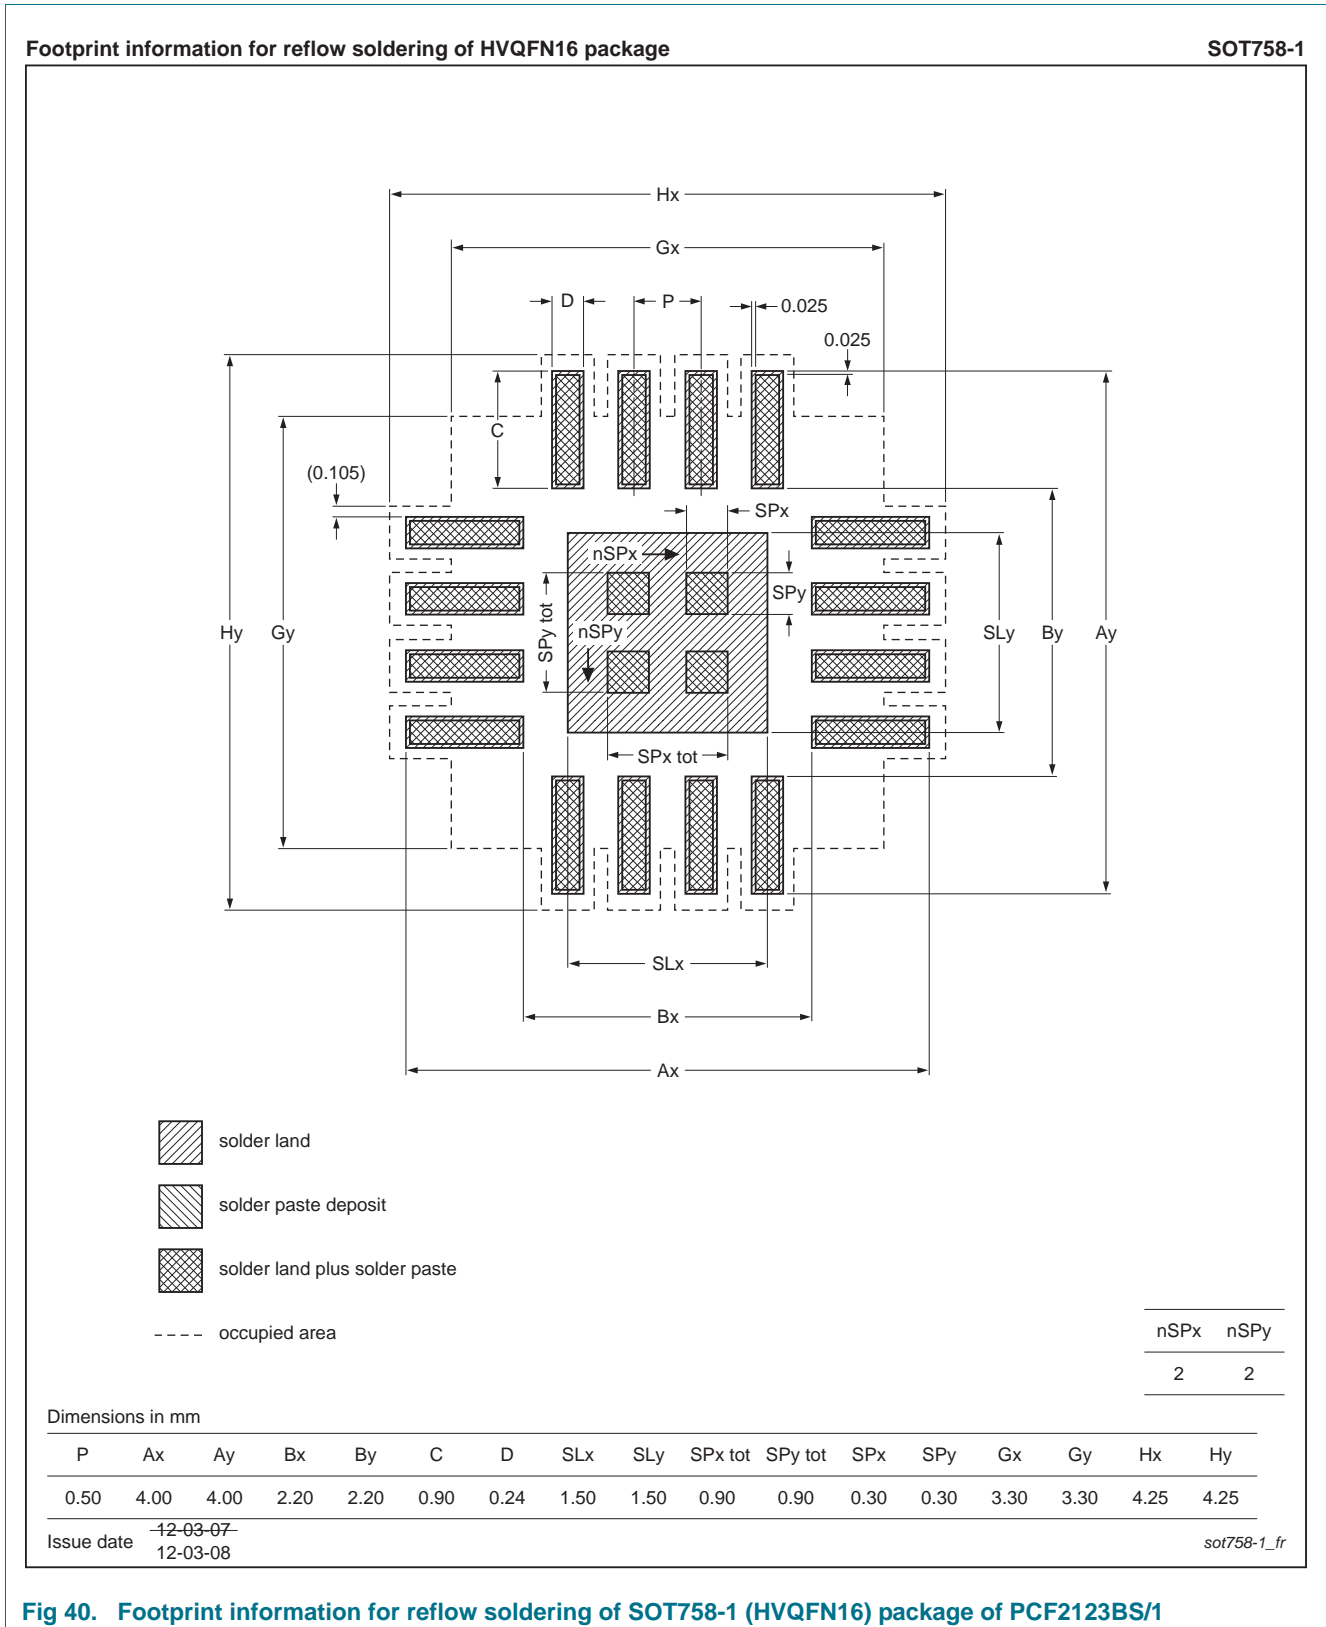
Footprint information for reflow soldering of SOT758-1 (HVQFN16) package of PCF2123BS/1
